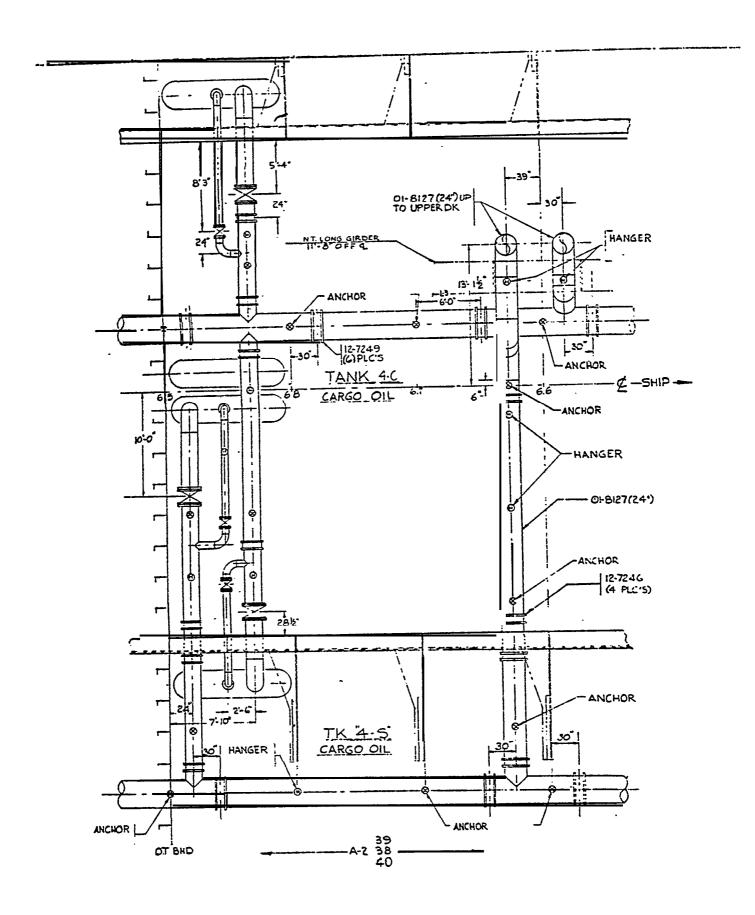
Arrangement of Steel Cargo In-Tank Piping
